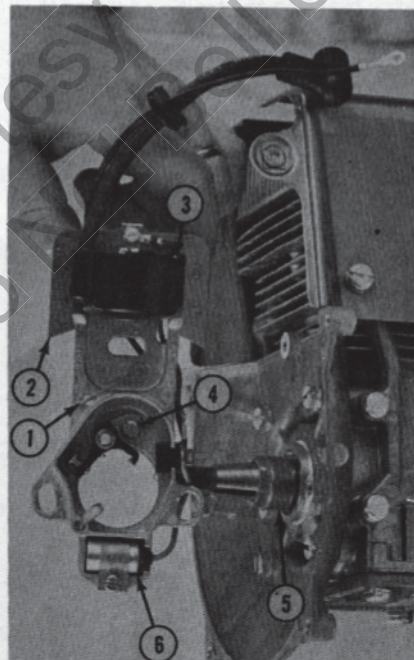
On some chain saw engines, the magneto stator plate mounting holes are slotted as shown so that ignition timing can be adjusted by relocating position of stator plate.
